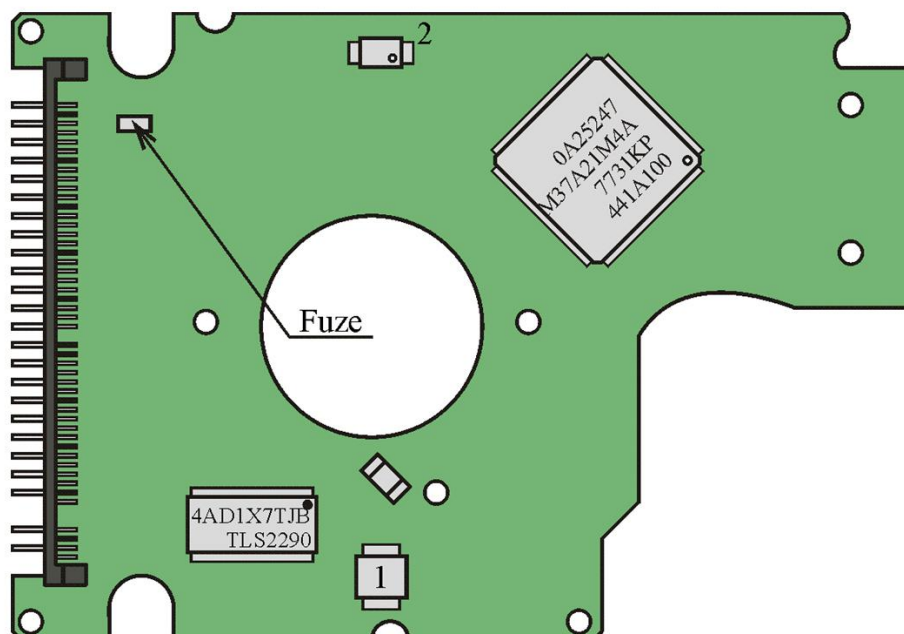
External view of the controller board in 4K40, HTS424 (HTS424M9) drive family.
